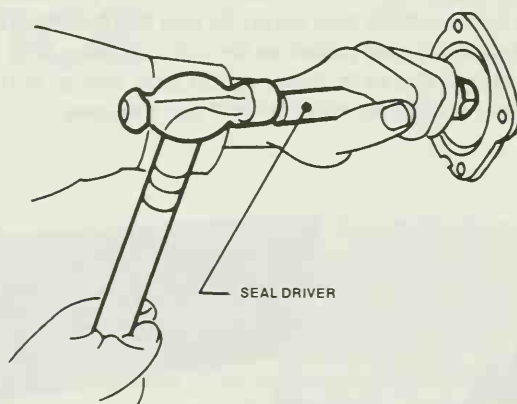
The new seal is driven into the housing with a seal driver. (Nissan Motor Corporation in USA)
